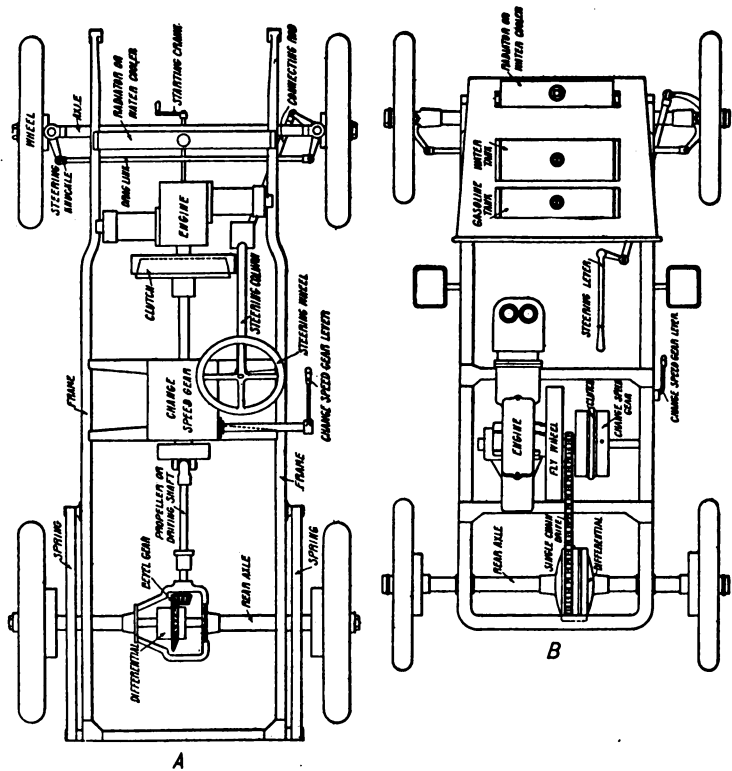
A, Propeller or driving-shaft drive; B, single-chain drive.
